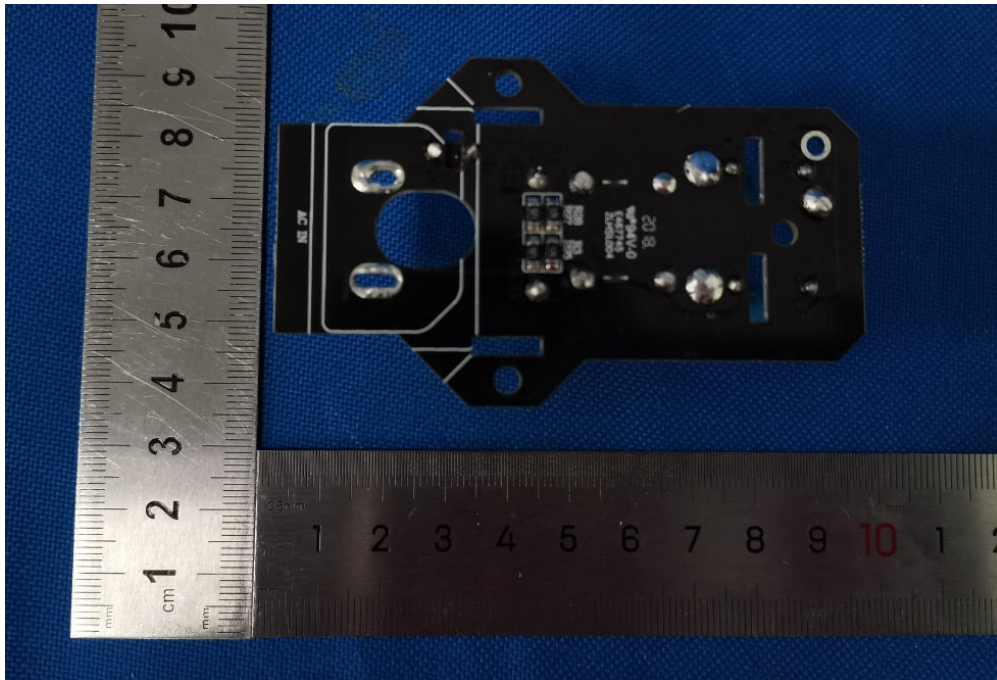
Primary board bottom view (in both active speaker and passive speaker)
